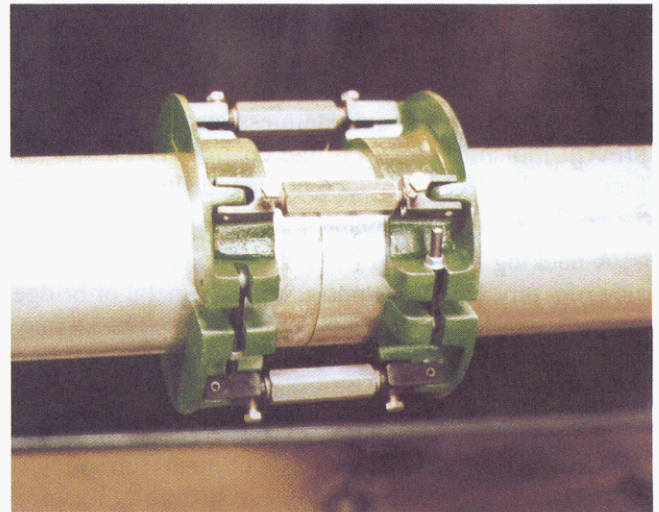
A Typical Bar Clamp Used to Hold Pipe Ends Together for Tack Welding
